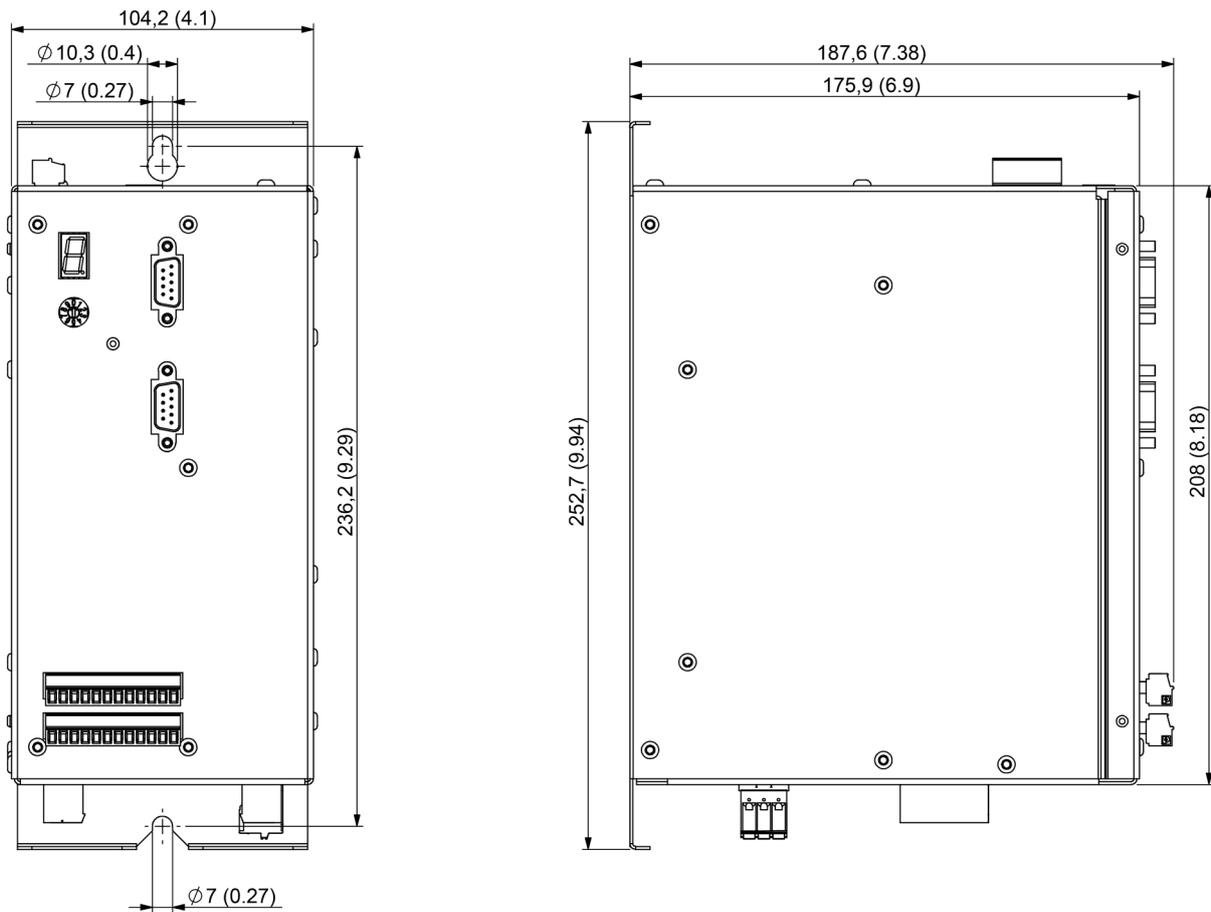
Dimensions of 0362x43xx in mm (inch)
